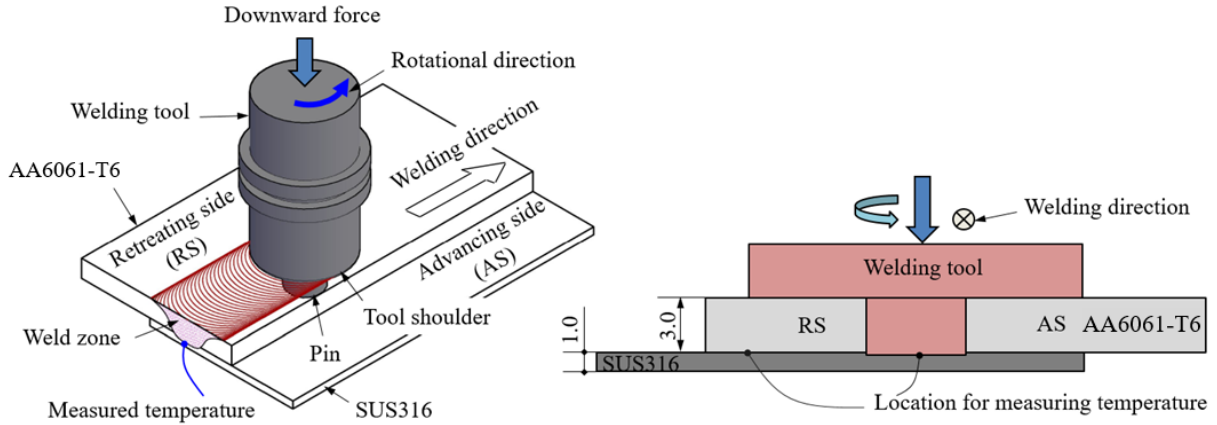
FSW process between AA6061-T6 and SUS316
